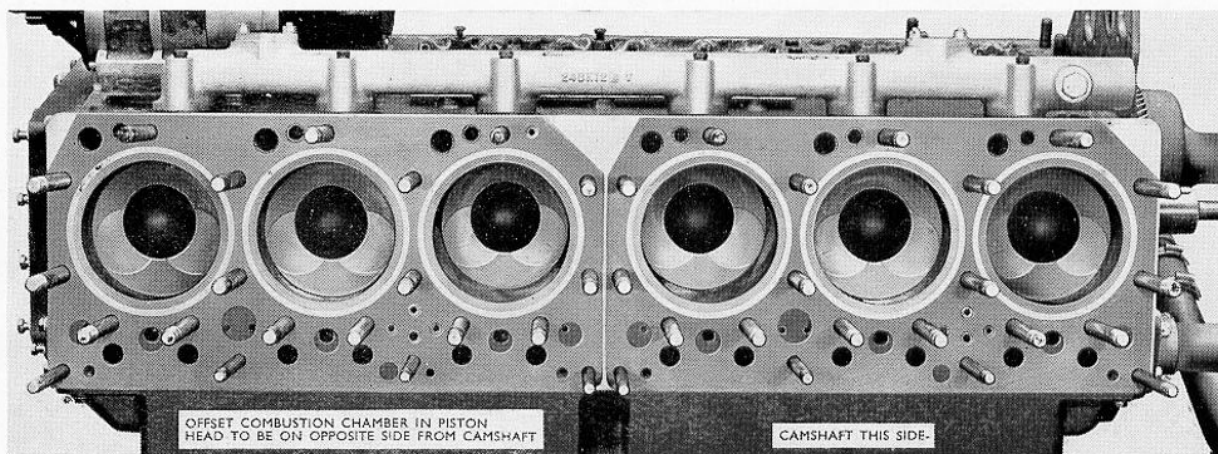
POSITION OF OFFSET COMBUSTION CHAMBERS IN PISTON HEADS, IN RELATION TO THE CAMSHAFT
